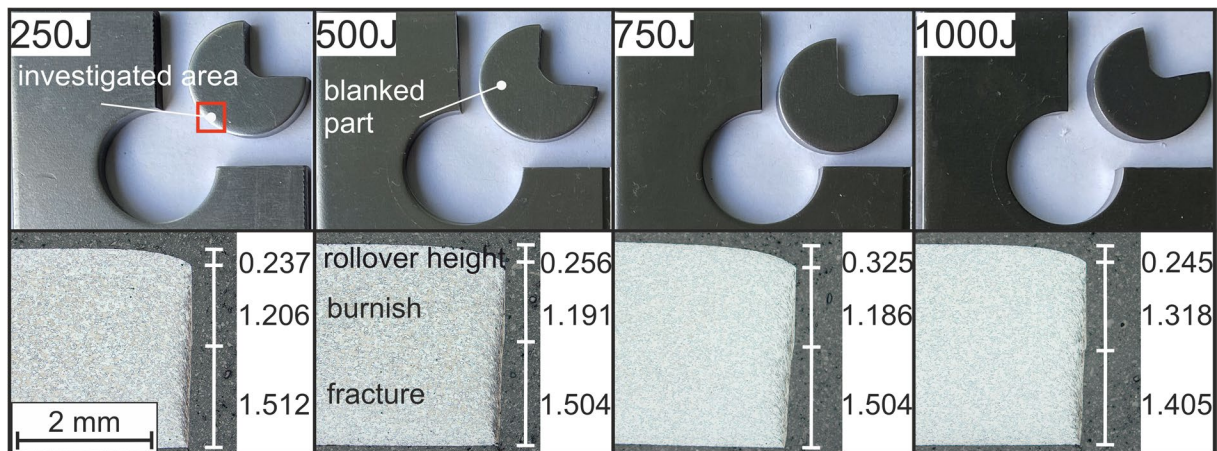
Cut parts optical images of the corresponding cut surfaces produced using energy levels from 250 J to 1000 J. The rollover height, burnish and fracture surface fractions were measured in mm.
